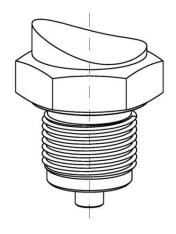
Overall dimensions of a measuring head for transmitter APC(R)-2000ALW.
